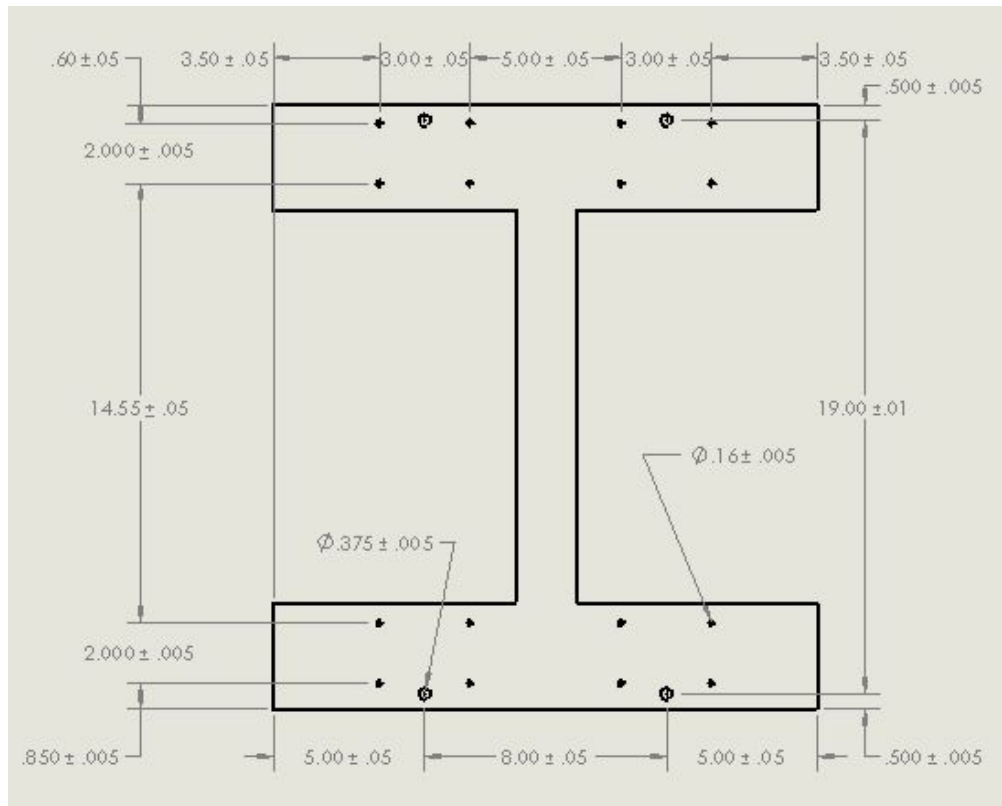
Hole Locations in Wooden Platform (Side View)
